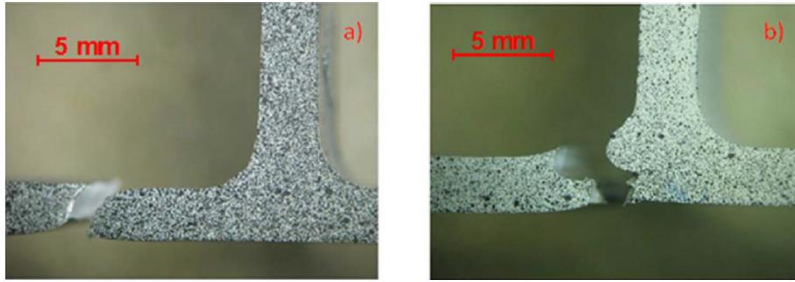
Examples of the fracture zone for the tensile tests. (a): sample BPP6-1 and Fig. 18(b): sample LTT6-3.
